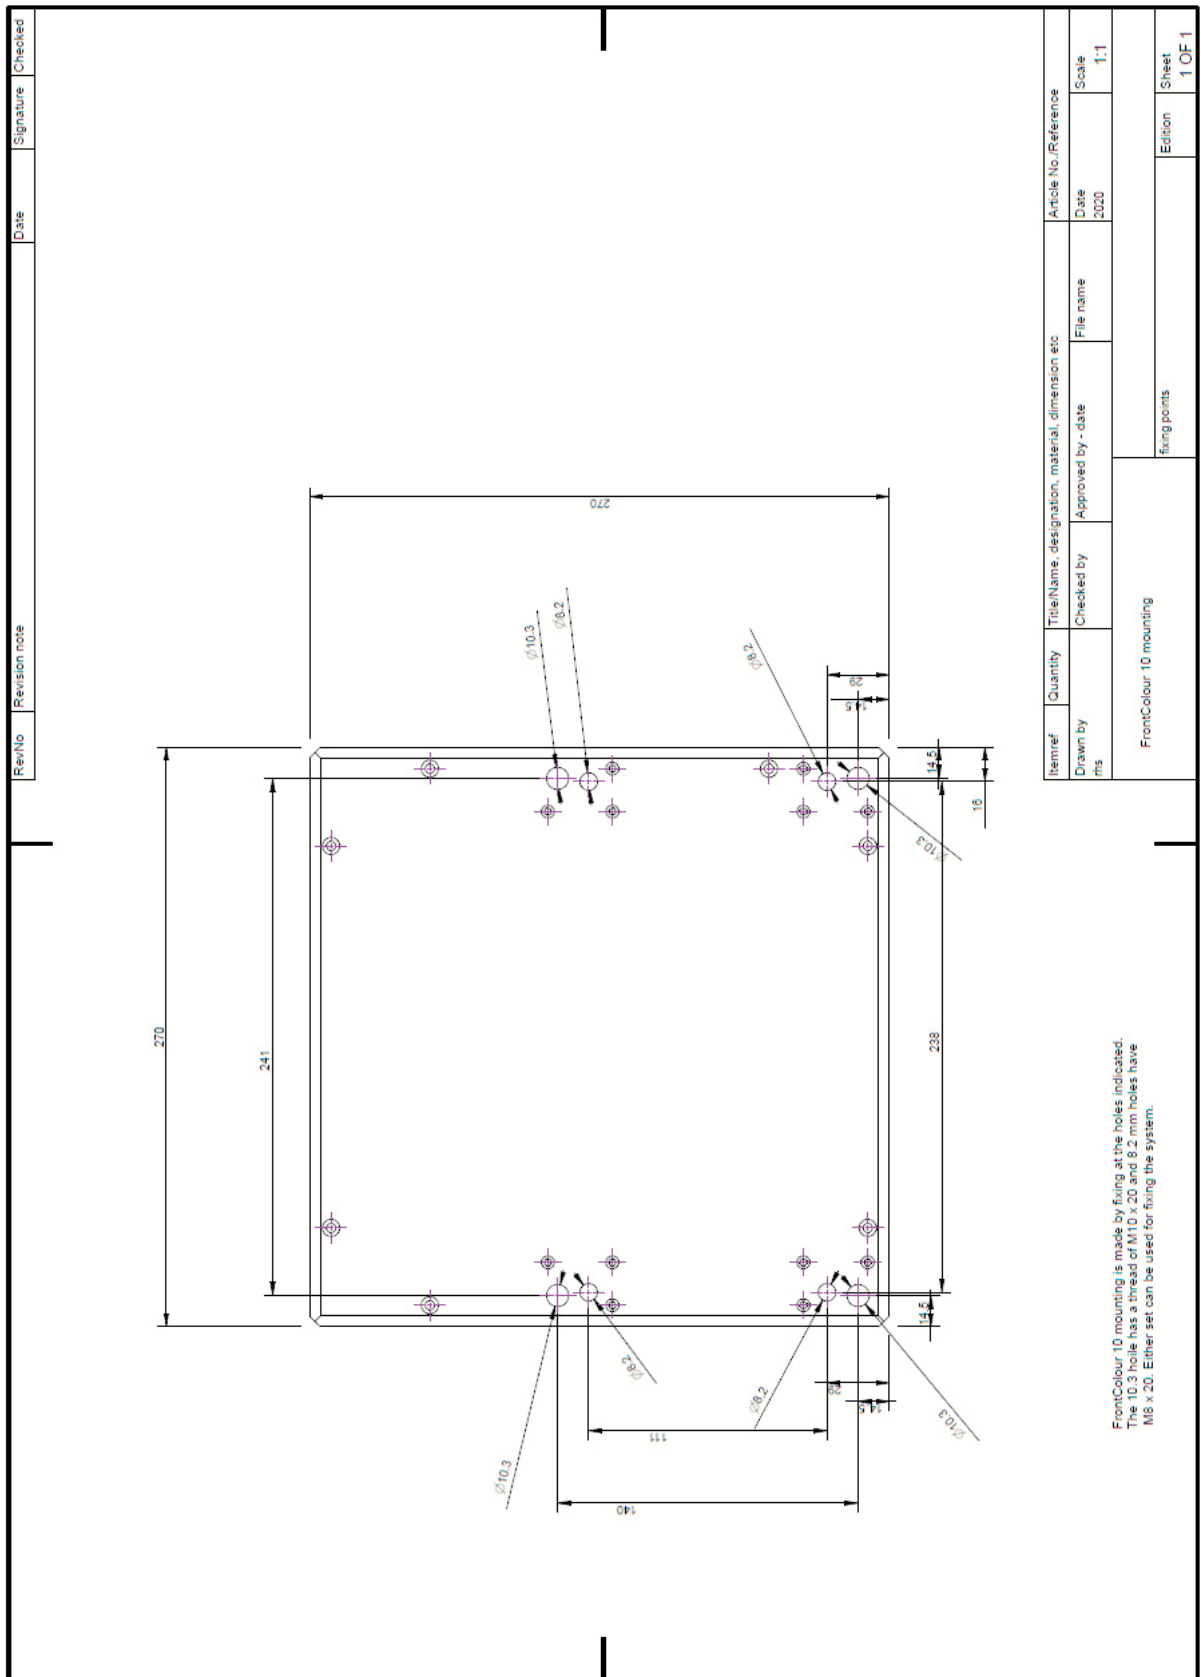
Mechanical assembly fixing points of FrontColour10 Colour meter (not to scale)
